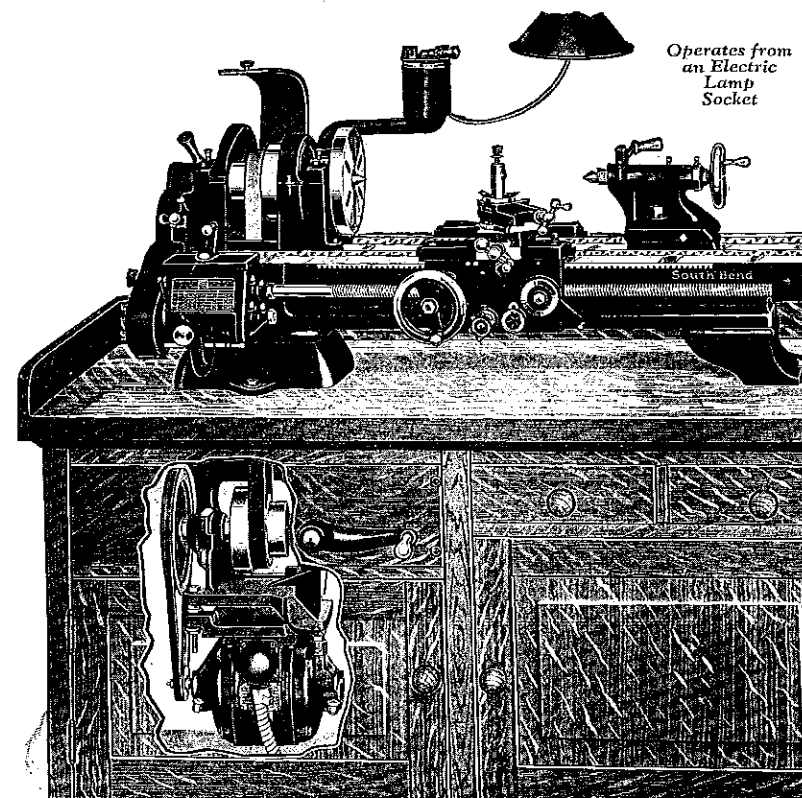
South Bend Underneath Belt Motor Driven Bench Lathe with Section of Bench Front Cut Away to Show Drive Mechanism. Bench used is illustrated and described on page 62.
